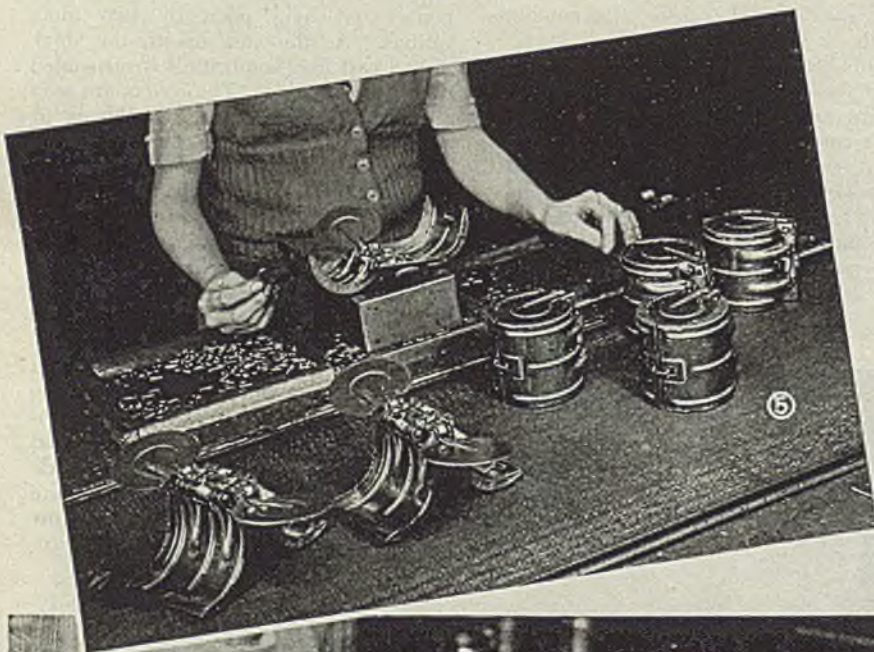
In this fixture, operation of the spring actuated covers and wings is checked by pulling down into box-like fixture and the assembly locked in the closed position by inserting clips as shown
